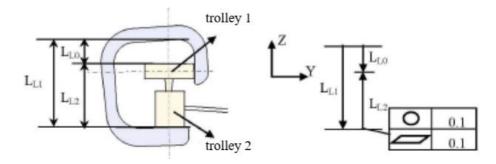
Fitting state(left) and dimensional chain with GD&T(right) in Z axis (lower set)
